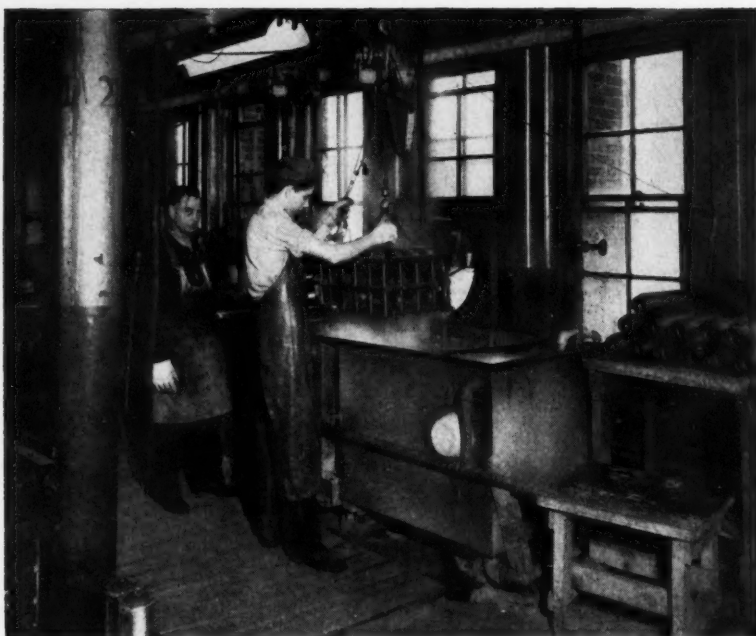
The Intervening Forming and Machining Operations Make a Second Cleaning Operation Necessary to Remove All Oil, Chips, and Dirt
